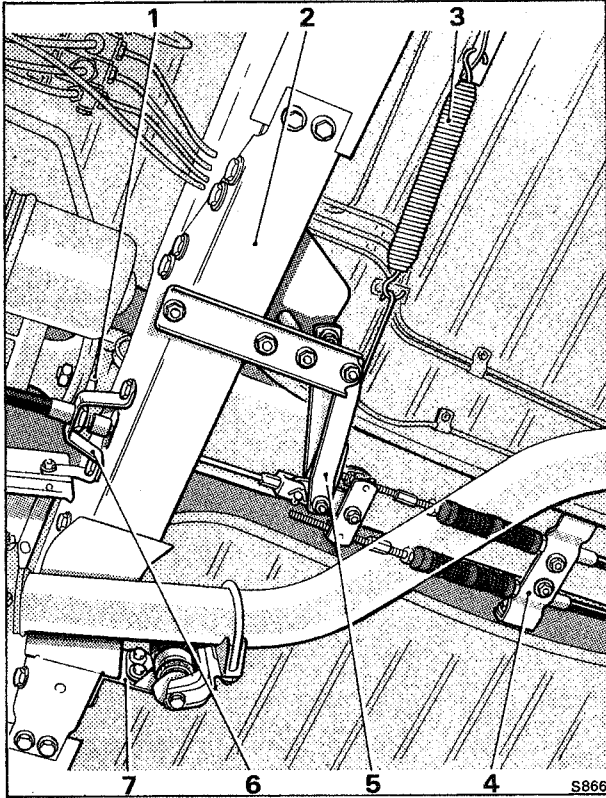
Centre crossmember and parking brake linkage. Left hand drive car
